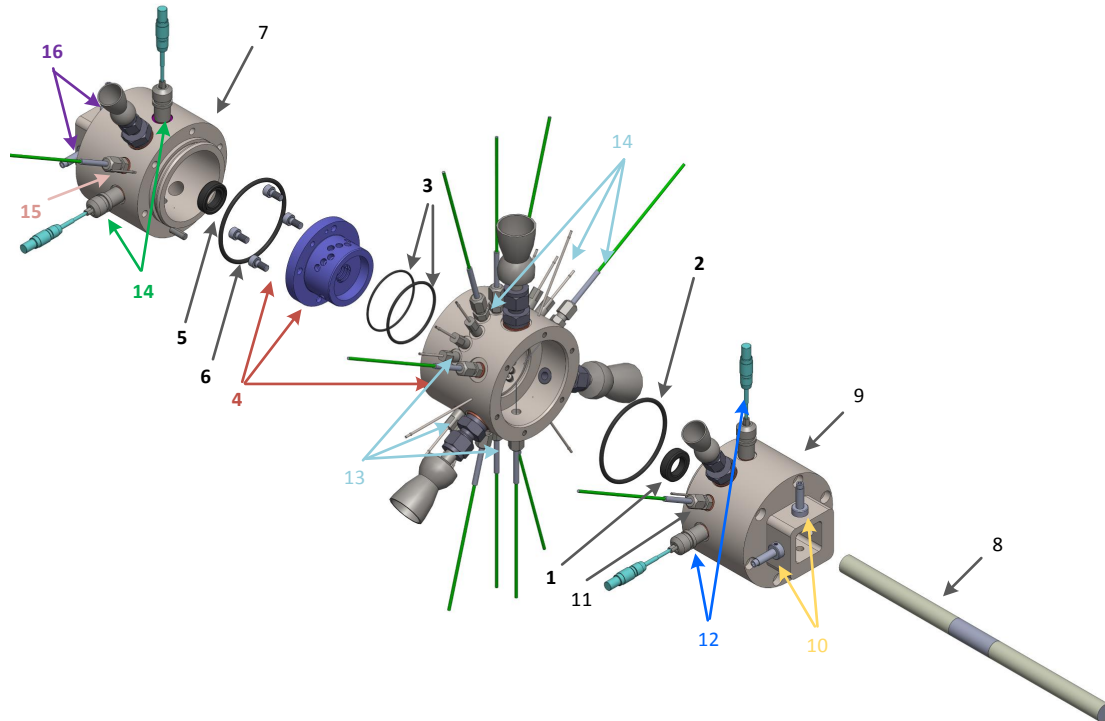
Exploded view of the seal test section: assembly steps in a chronological order
